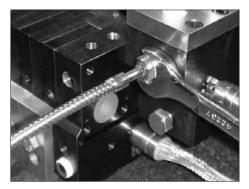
Installing a pressure transducer on the filter block (miniature transducer shown)
